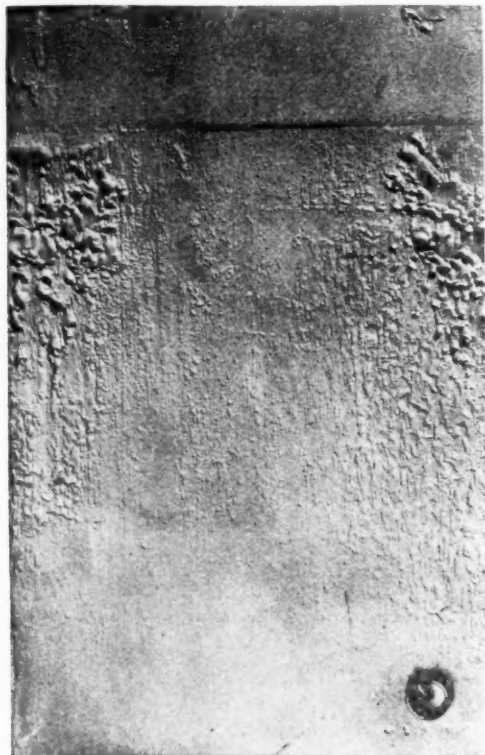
Corrosion on Tube Free from Interior Surface Defects.
